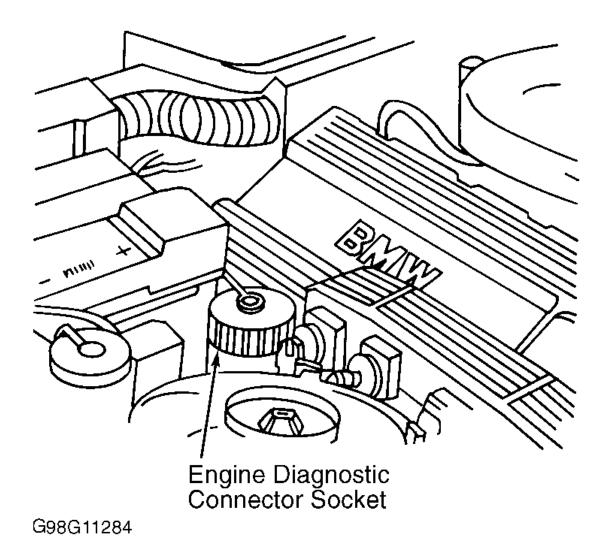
Locating BMW Engine Diagnostic Connector Socket (4-Cylinder Shown) Courtesy of BMW OF NORTH AMERICA, INC.
